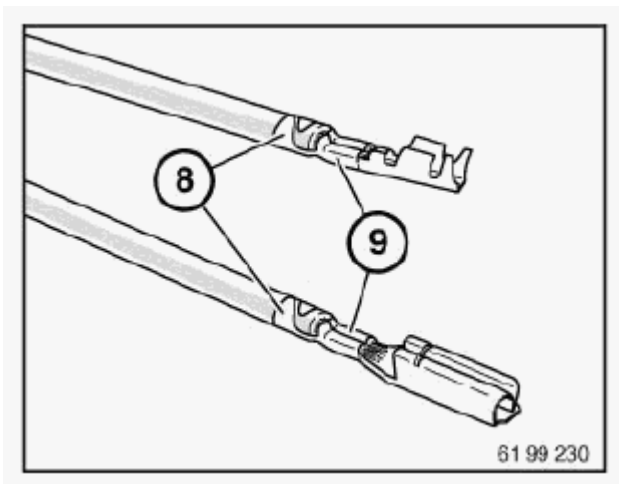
Identifying Insulation Crimp And Wire Crimp
